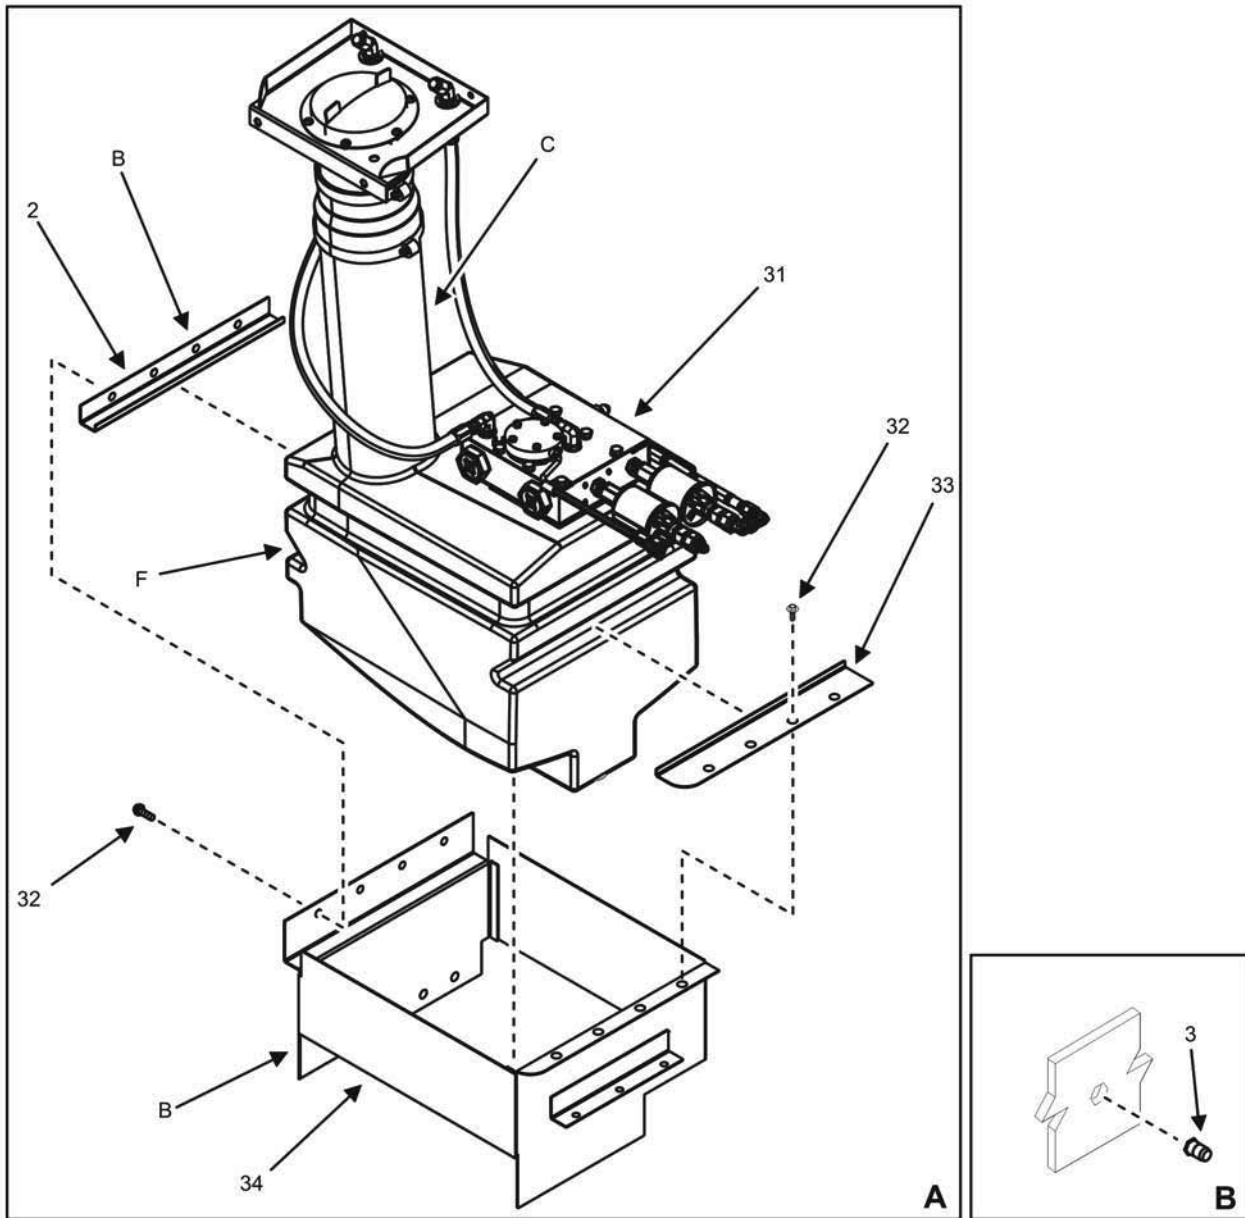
Fuel System Assembly (Sheet 2 of 6).
